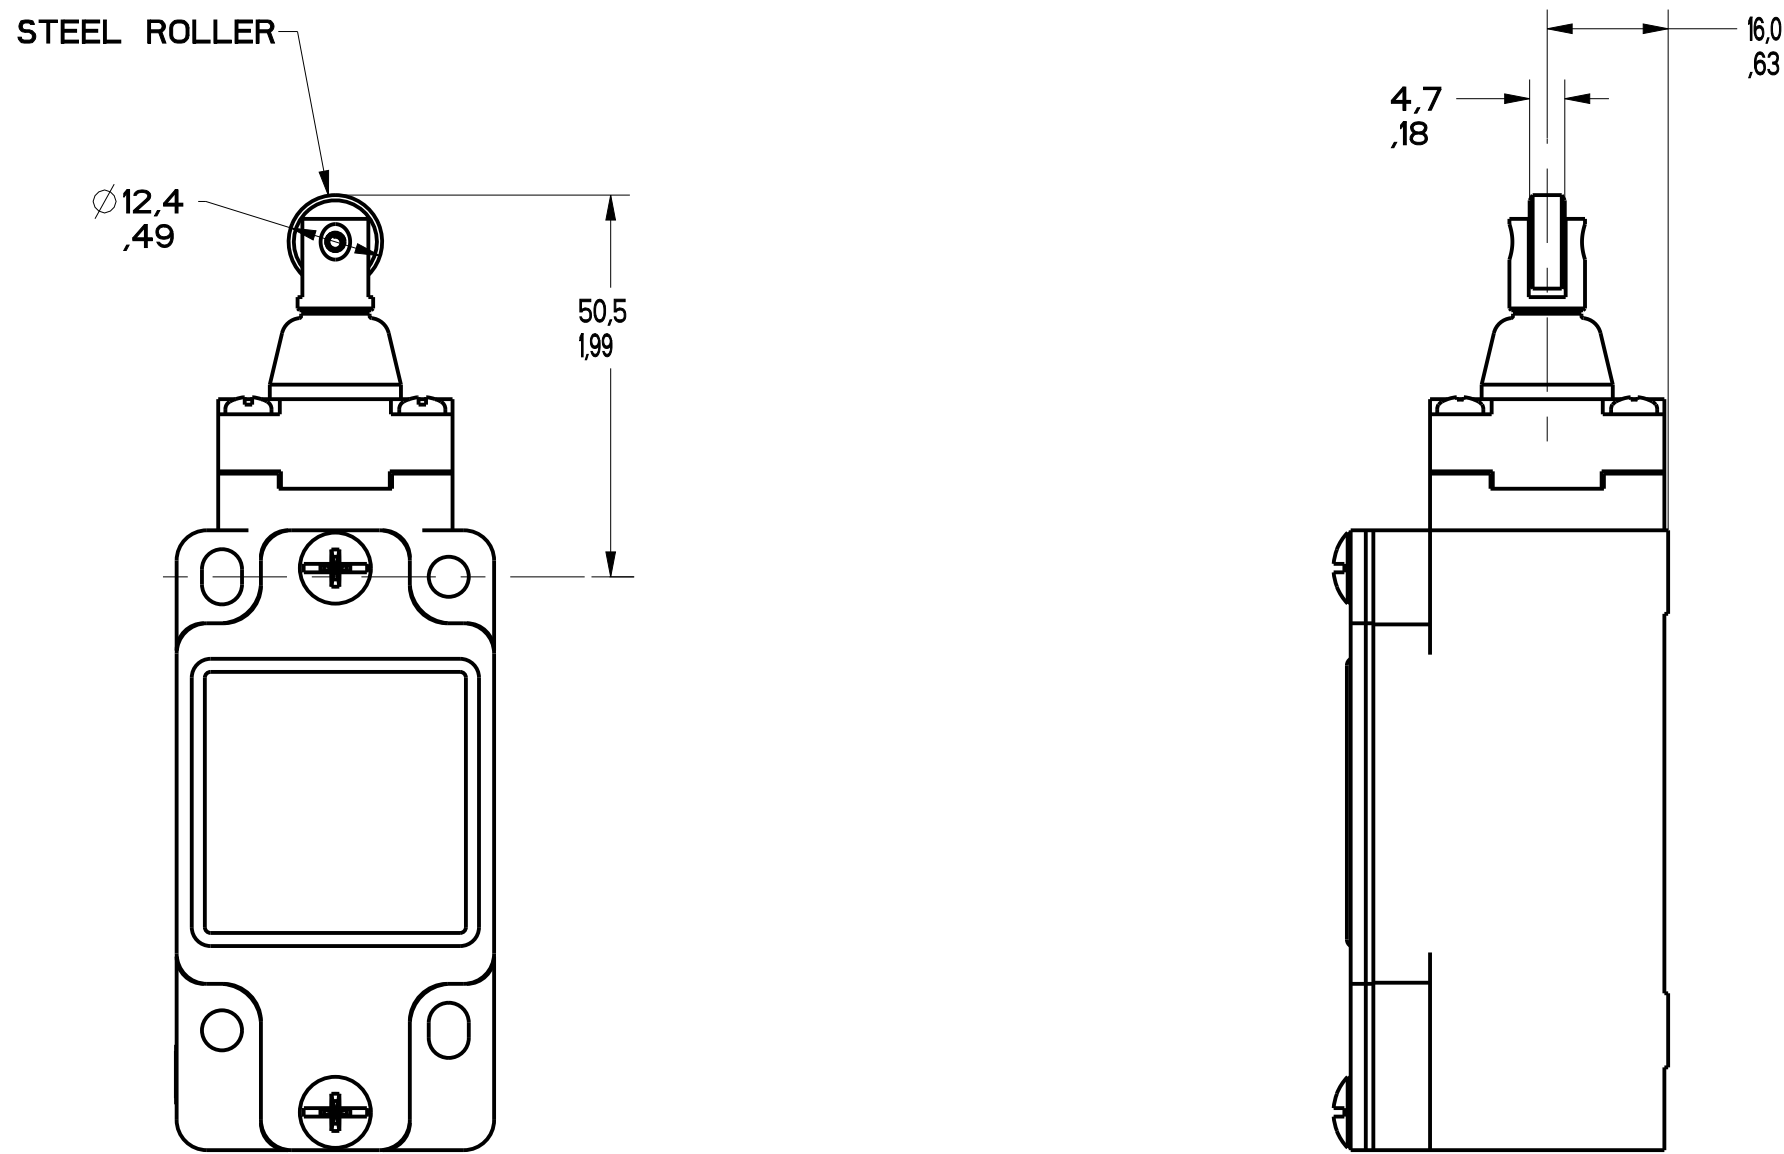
TOP ROLLER PLUNGER HEAD
